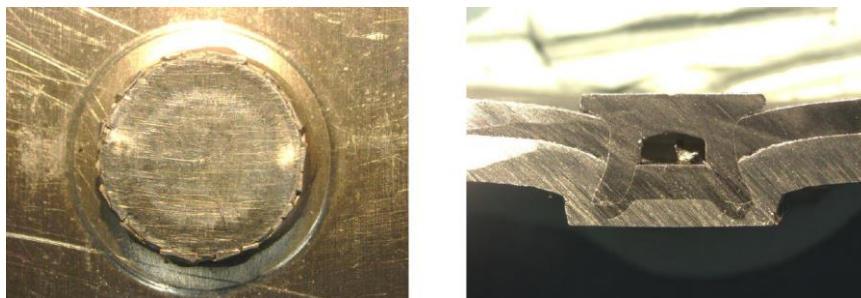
, Deeper die creates a better joint but causes cracking on the bottom
